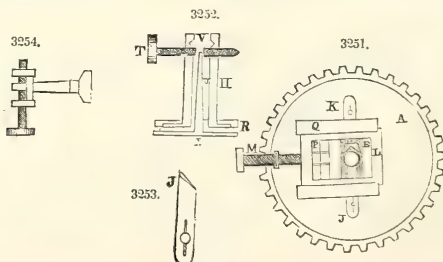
is a view of the face of the bevelled cog-wheel, carrying the dies, cutter and rest, &c.
